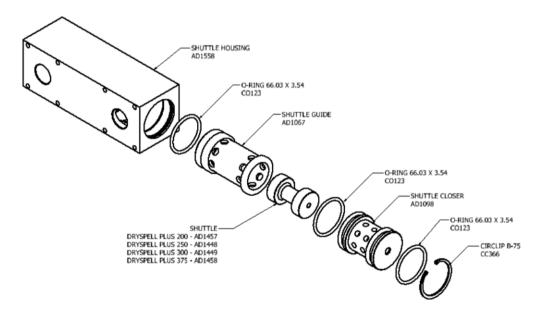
Exploded view of top shuttle-Dryspell Plus 200-375
